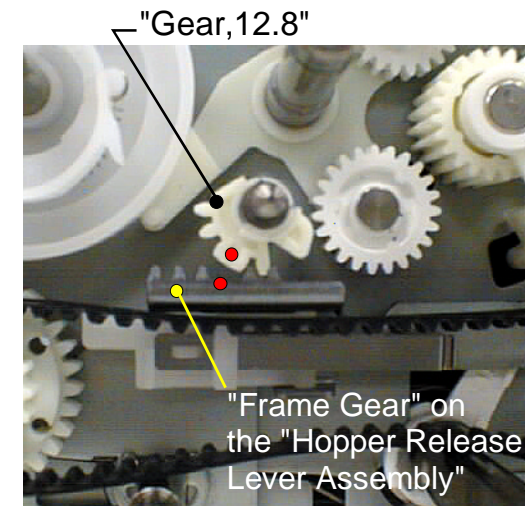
Adjusting alignment for "Gear, 12.8"
